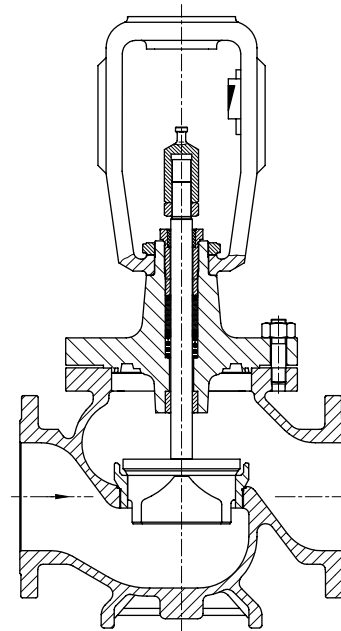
· Type 241 Globe Valve, sizes 8" to 10"
